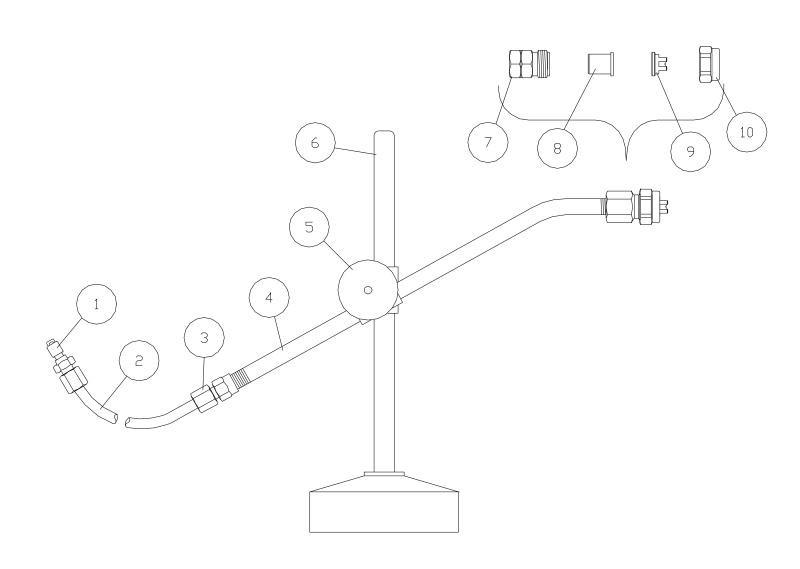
H.P. Magnetic Base Post, Tube, and Clamp Spray
